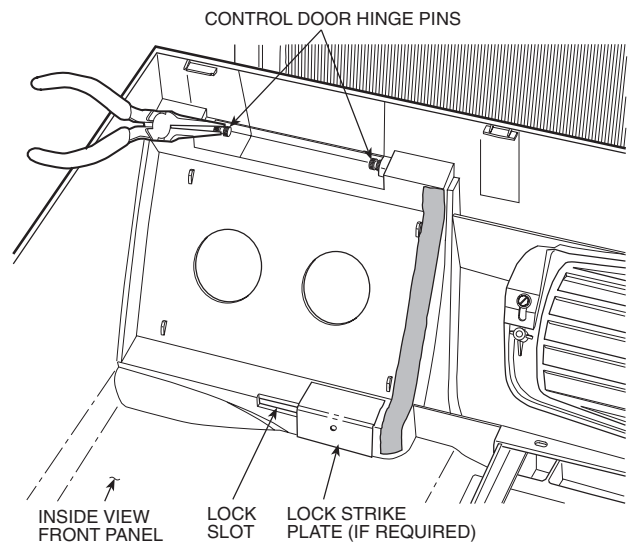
Removing Hinge Pins From Back of Front Panel
